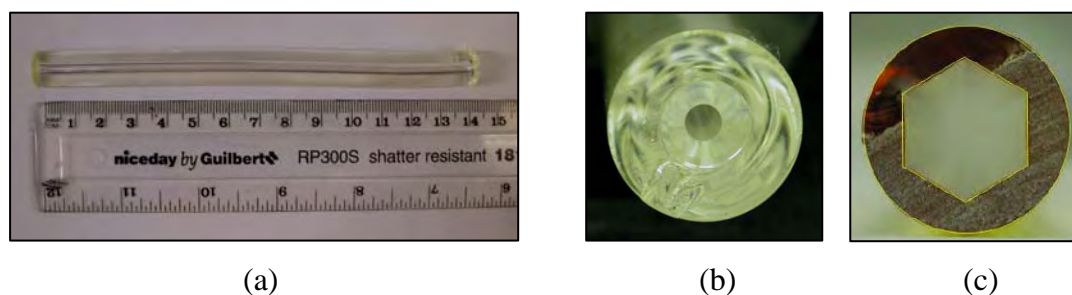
(a) 14cm long of extruded jacketing tube of 12 mm OD/1.8mm ID , (b) cross sectional view of the jacketing tube, (c) jacketing tube with hexagonal inner
